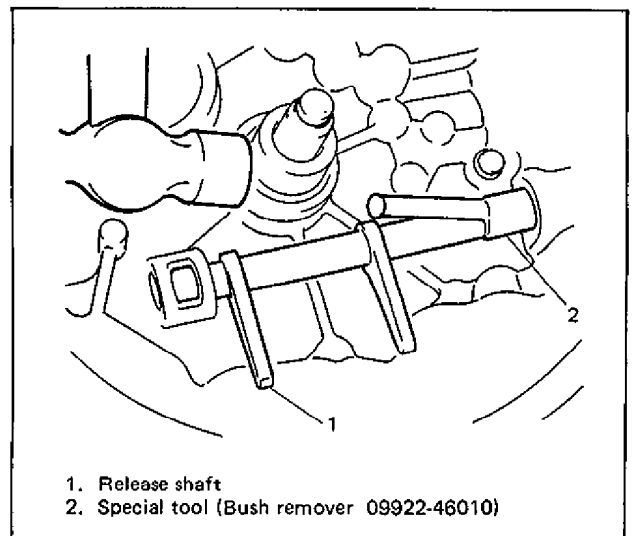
C1-11-1 Removing Release Shaft Bush No. 2
